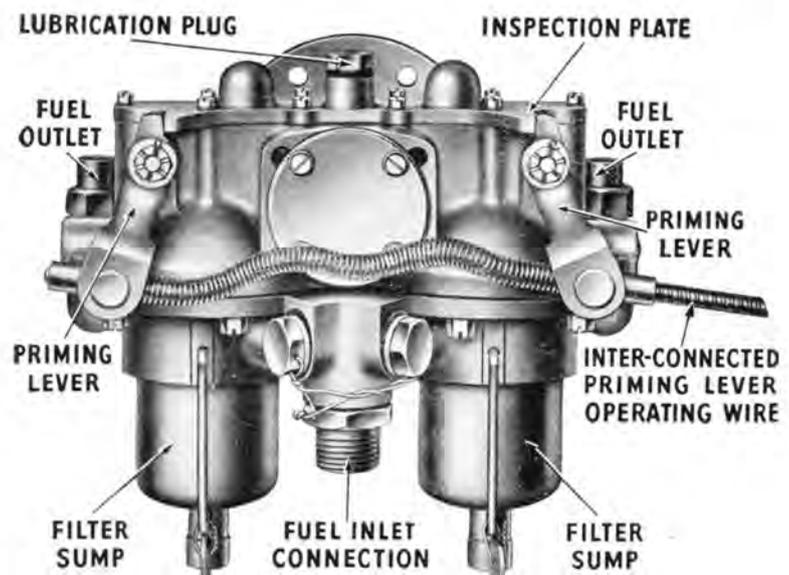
General view of "Amal" petrol pump. (The lubrication plug fitted should *not* be used for lubrication.)
